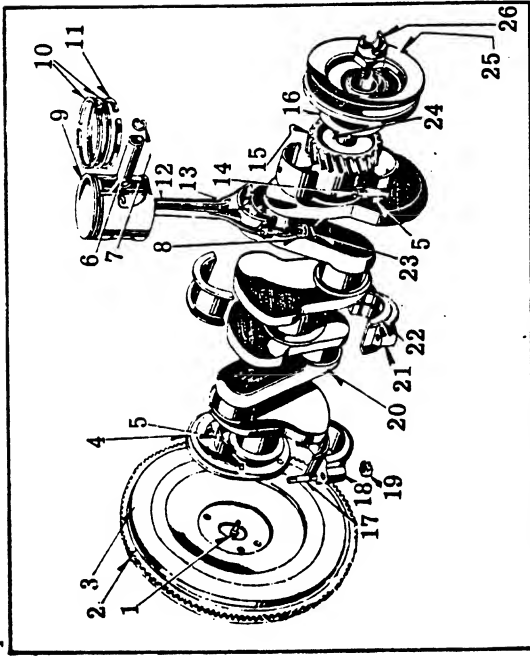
FLYWHEEL,CRANKSHAFT AND PISTON GROUP
